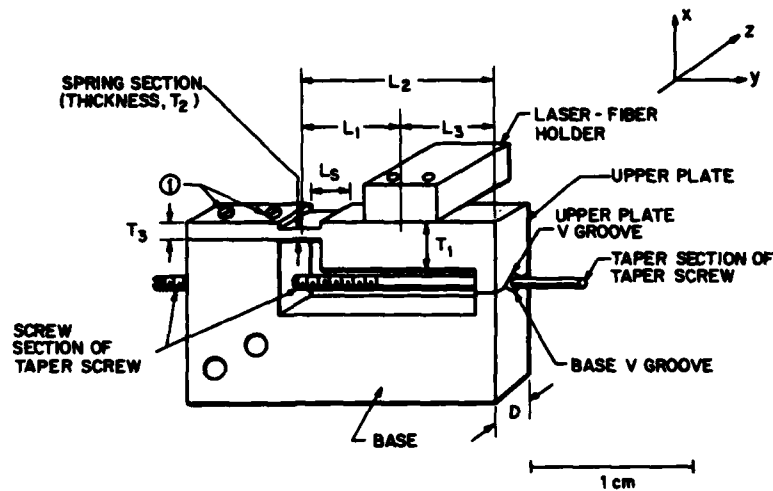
Schematic drawing of spring-loaded taper-screw microtranslator.
